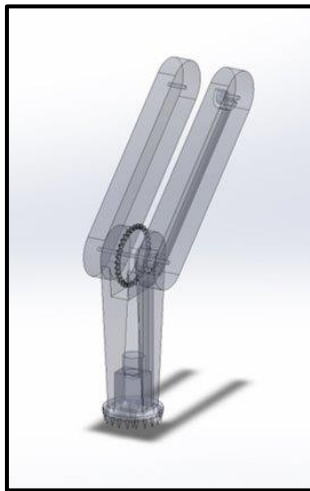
Initial leg design with room in the upper section for the lower section to fold into
